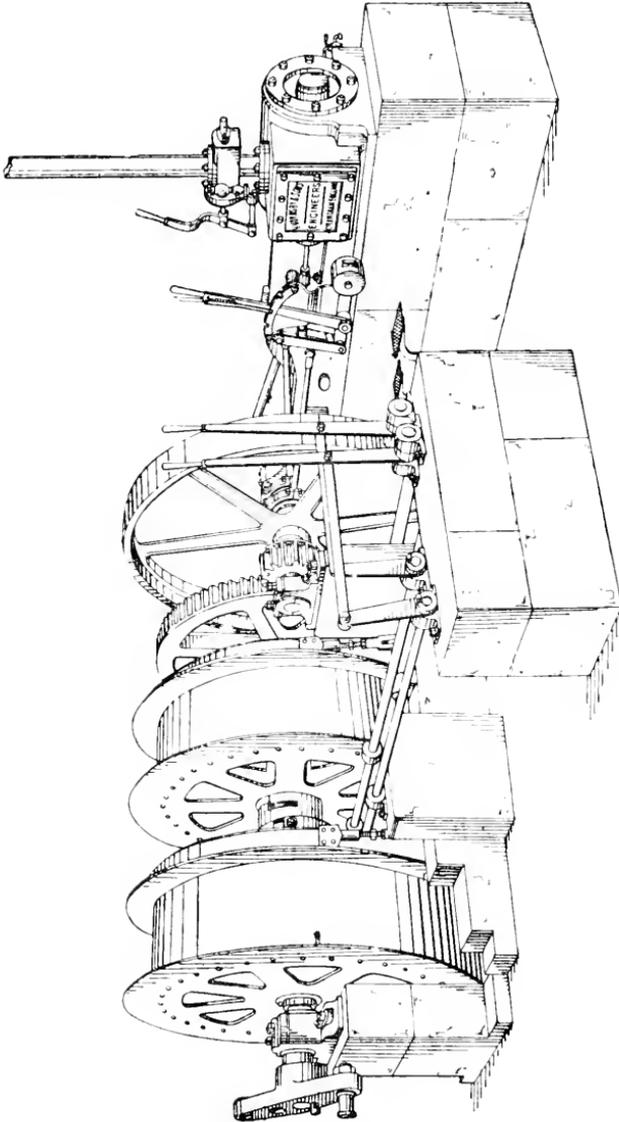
SINGLE CYLINDER WINDING AND PUMPING ENGINE.
